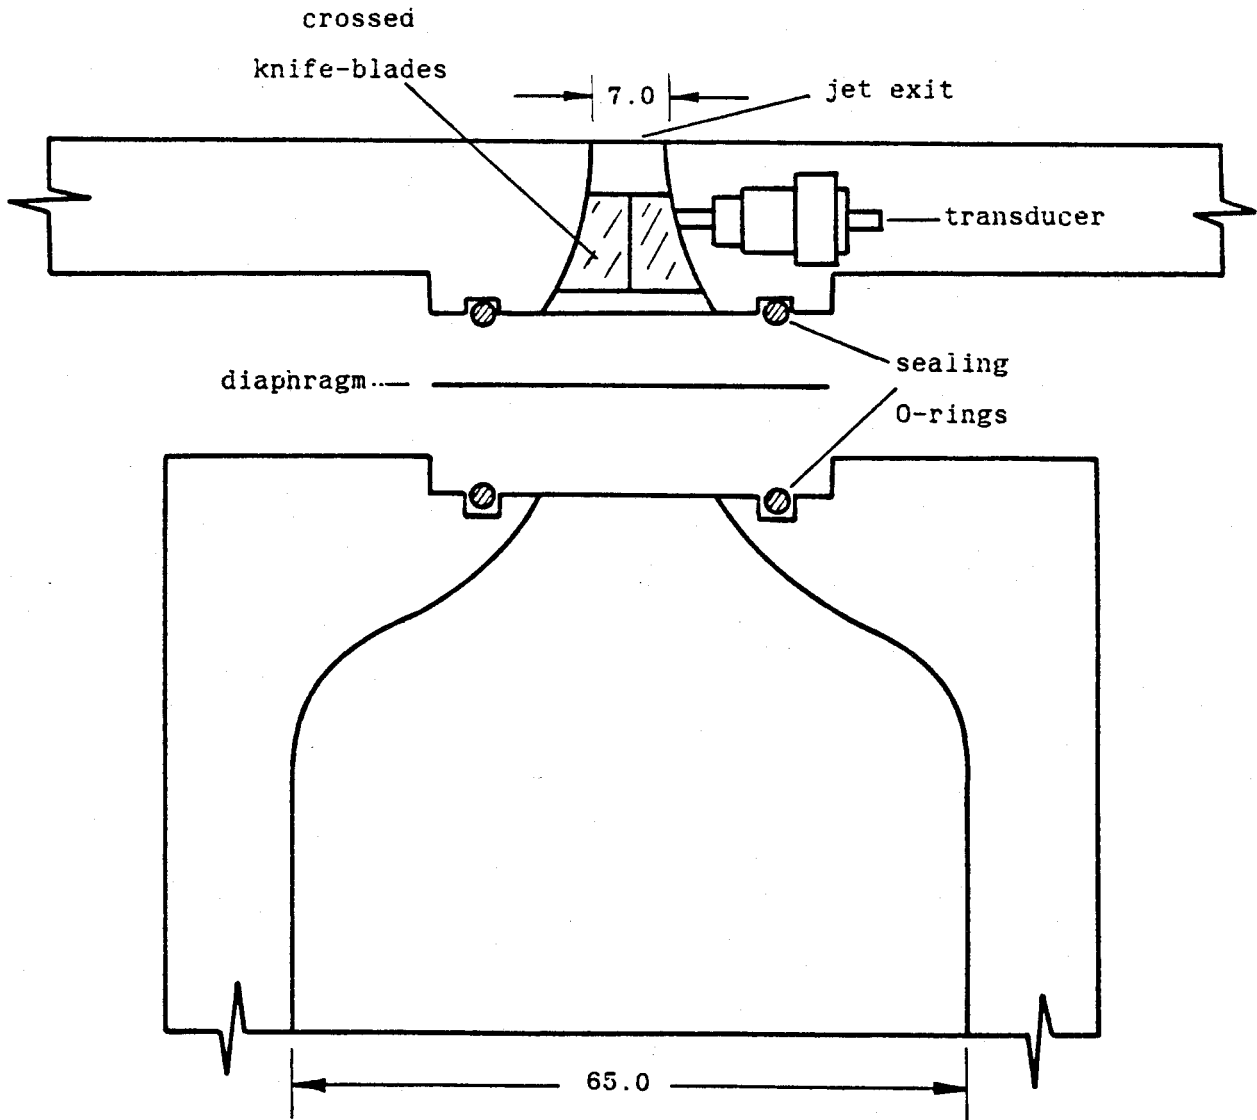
Exploded view of the contraction section, showing how the diaphragm is placed. The location of the cross-blades and the pressure transducer is also shown. Dimensions are in mm.
